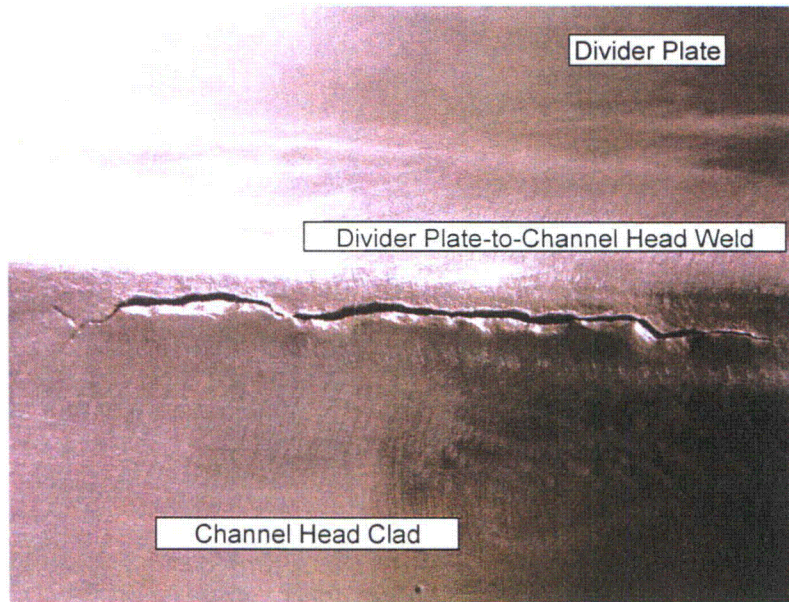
RSG 3B Crack in the Divider Plate-to-Channel Head Weld
